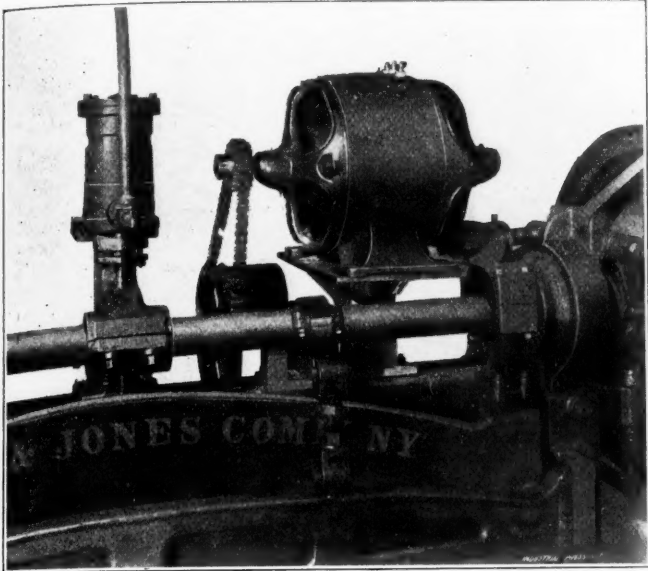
Hilles & Jones Gate Shear. Driven by General Electric Motor and Renold Chain.
